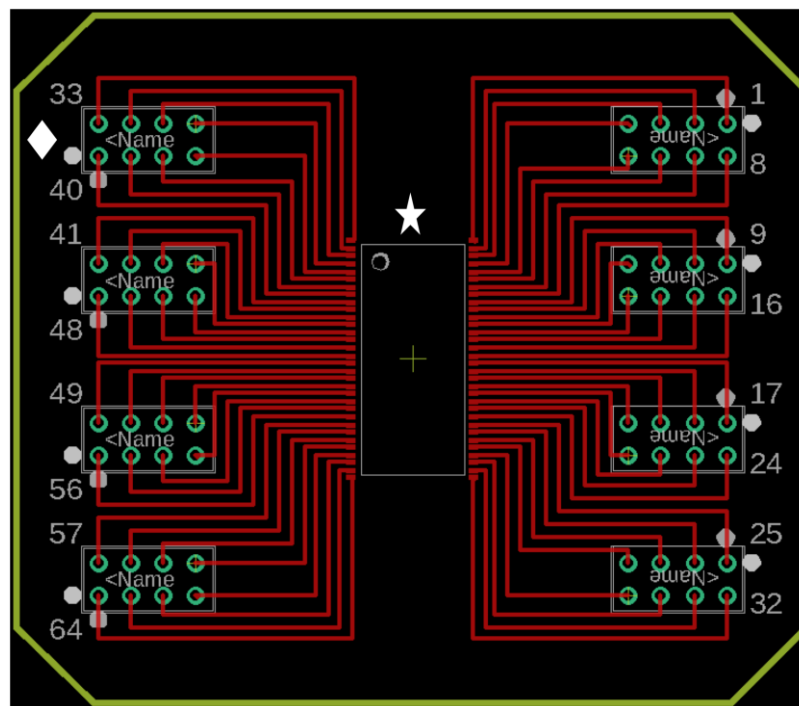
Schematic layout of the sample-mounting PCB used to demonstrate the MQW beam steering metasurface. Rectangles denoted by star-shaped polygon and diamond outline the metasurface sample and 8-pin connector headers, respectively.
